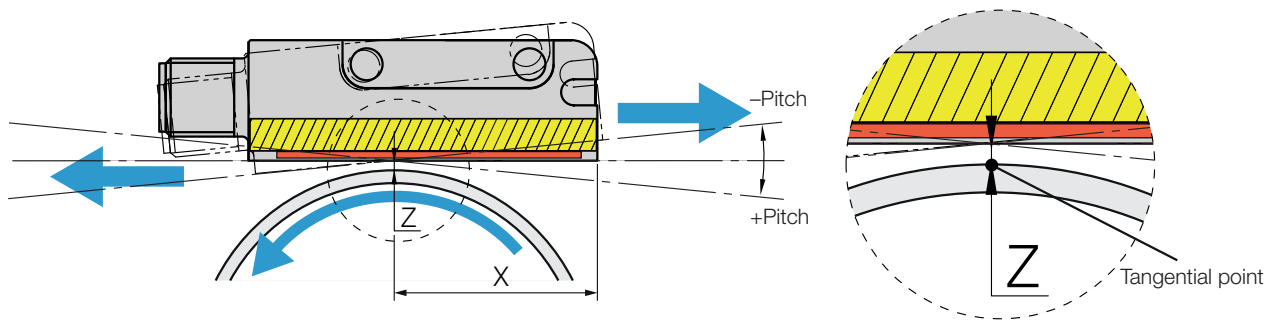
Tolerances for applications with arch-shaped magnetic tape
